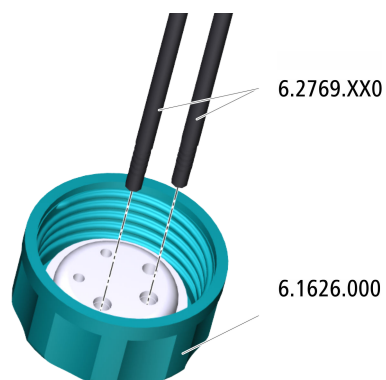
Bottle cap for level sensor - Inserting the measuring sensors
